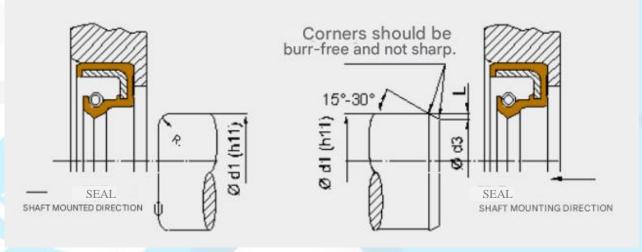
Dimensioning of radius and chamfer according to the assembly direction of the seal
